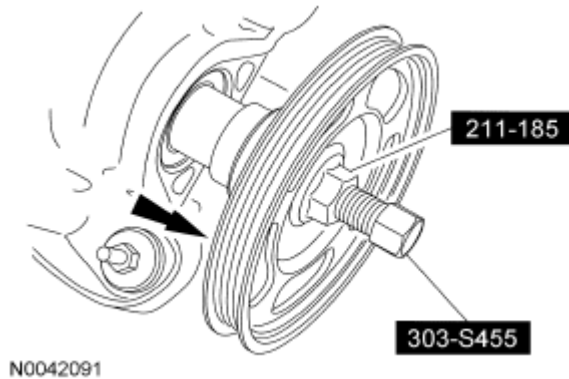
Identifying Special Tools (211-185 And 303-S455) And Coolant Pump Drive Pulley
